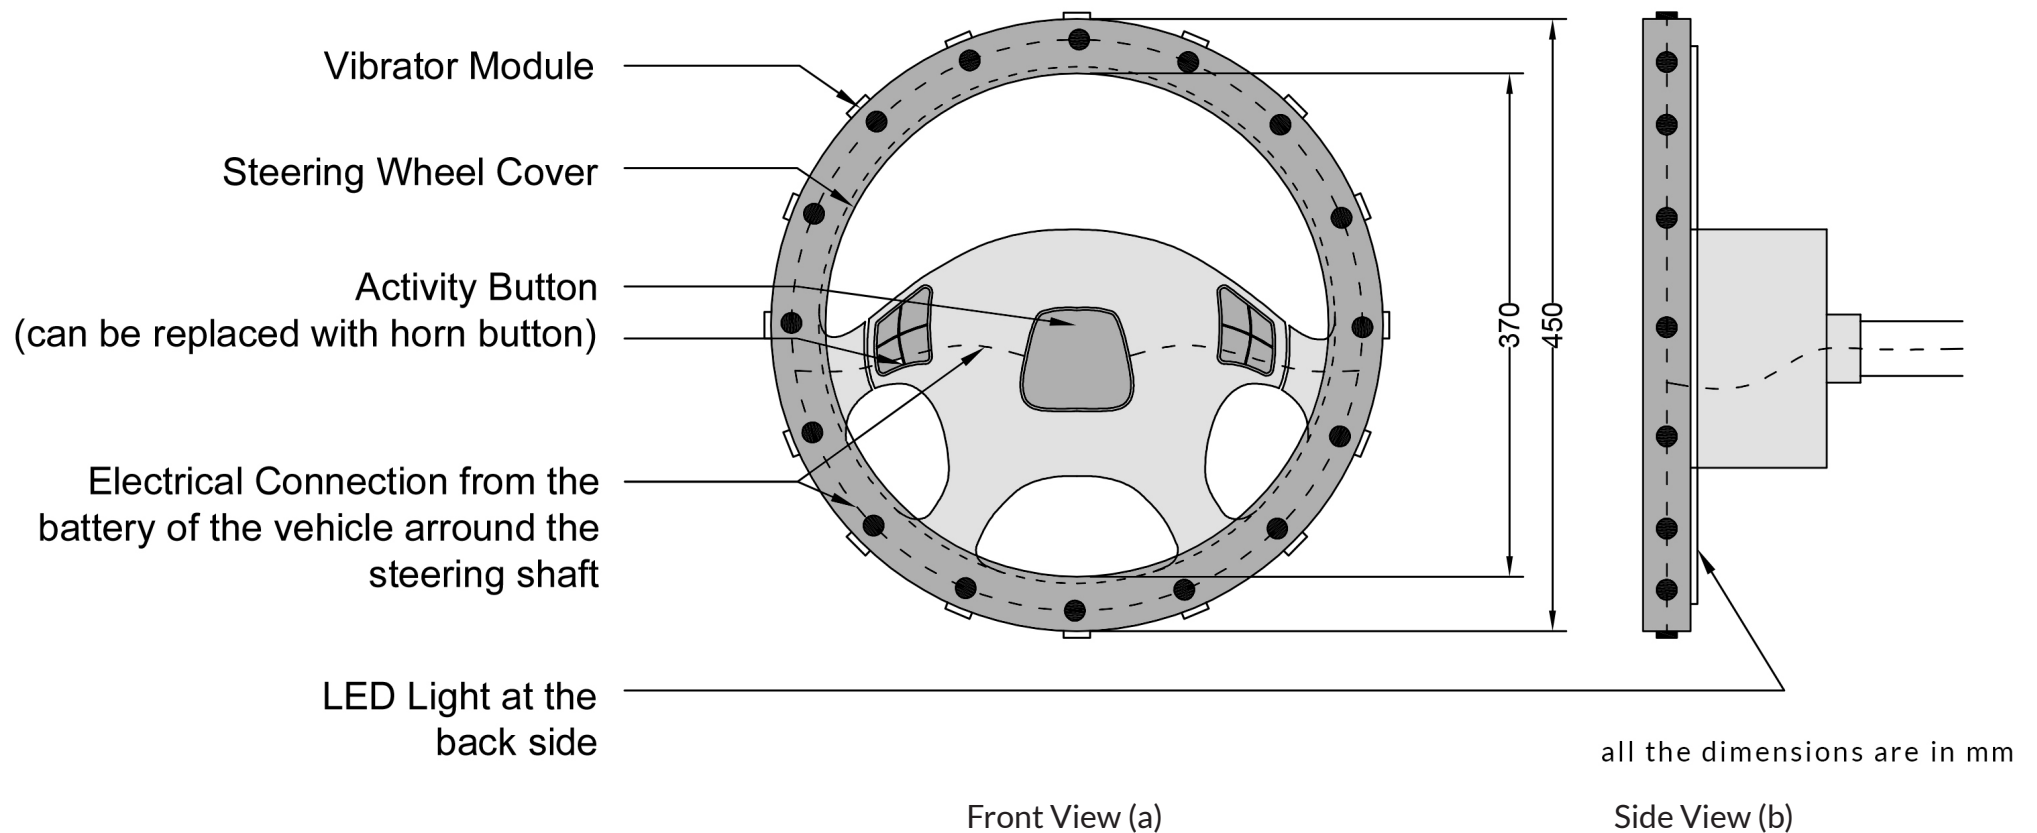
(c) - Detail drawing of the Steering Wheel Cover
